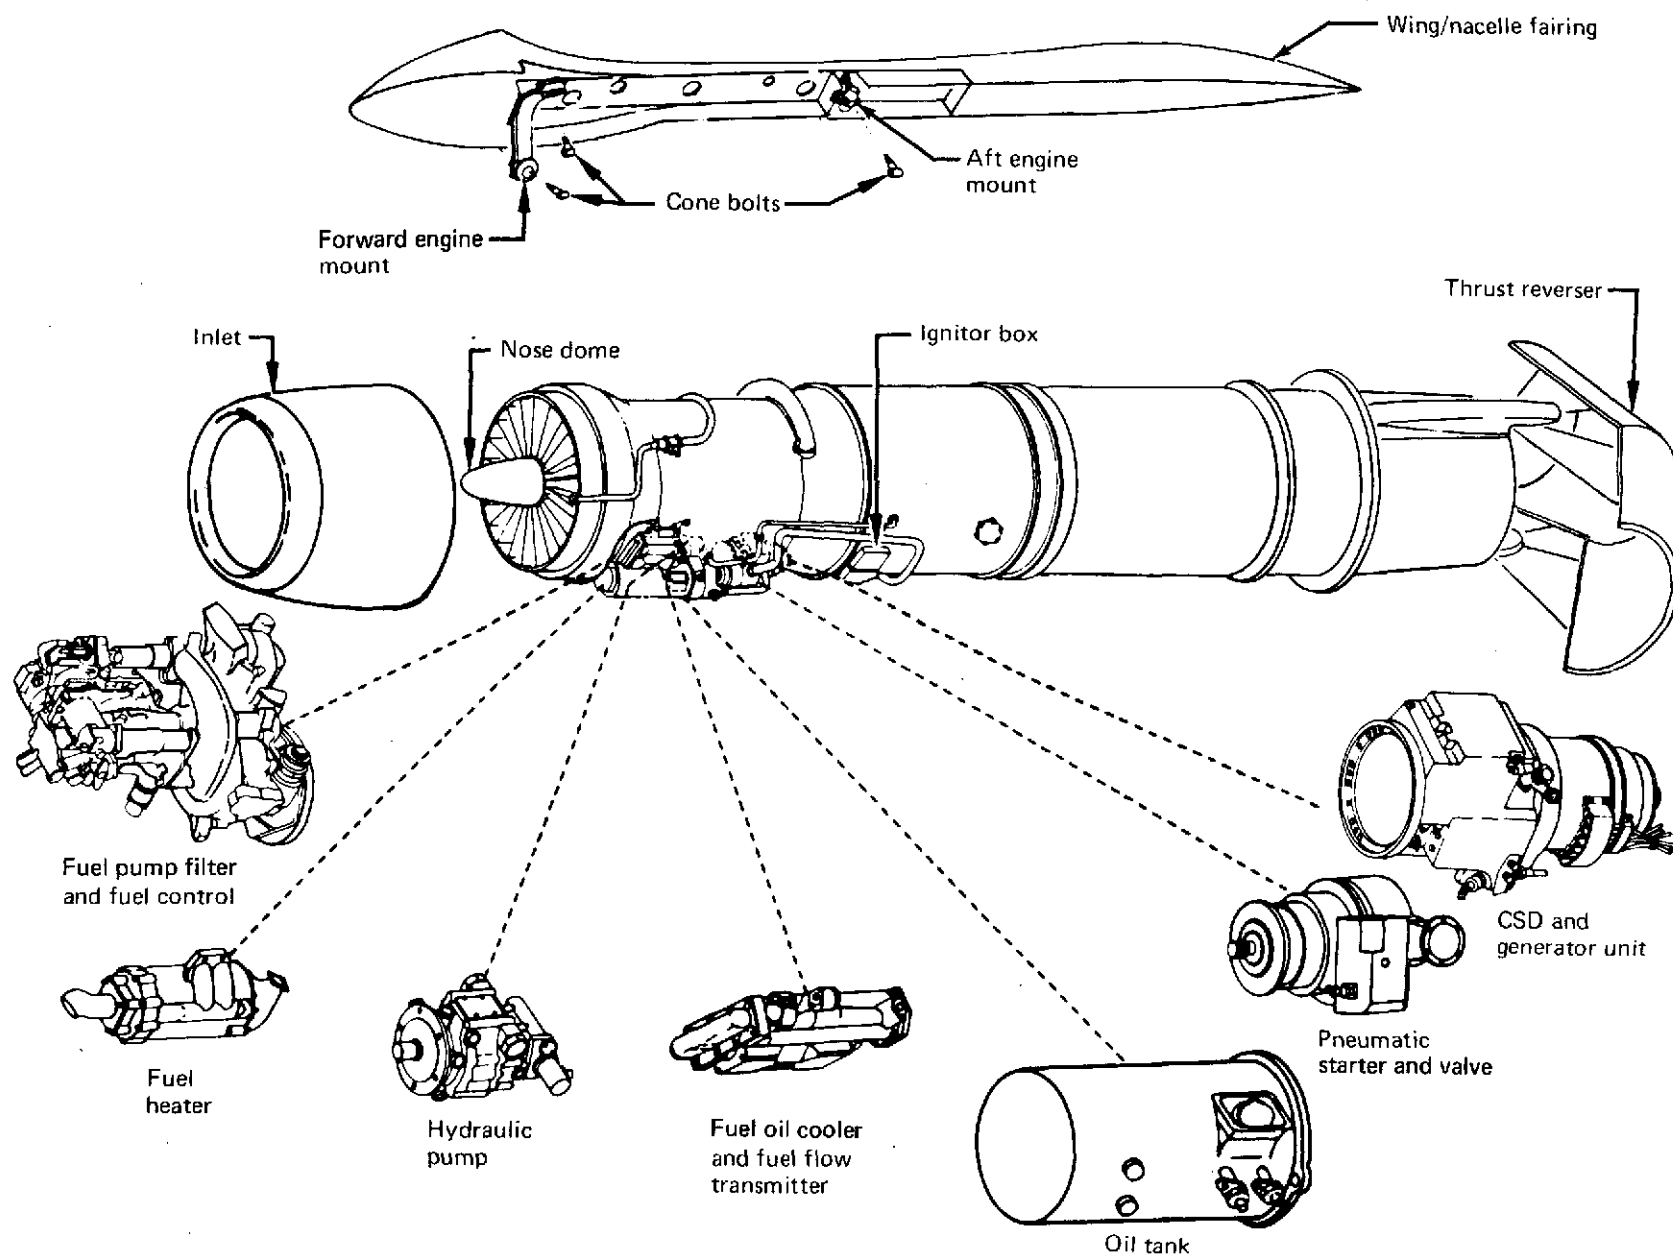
737/JT8D-109 POWER PLANT INSTALLATION
